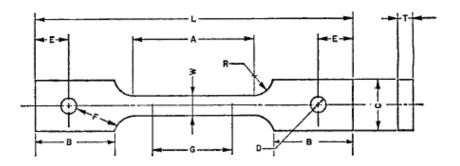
ASTM E8 – Sheet type pin-loaded tensile test specimen with 50mm gage length and minimum 200 mm of overall length
